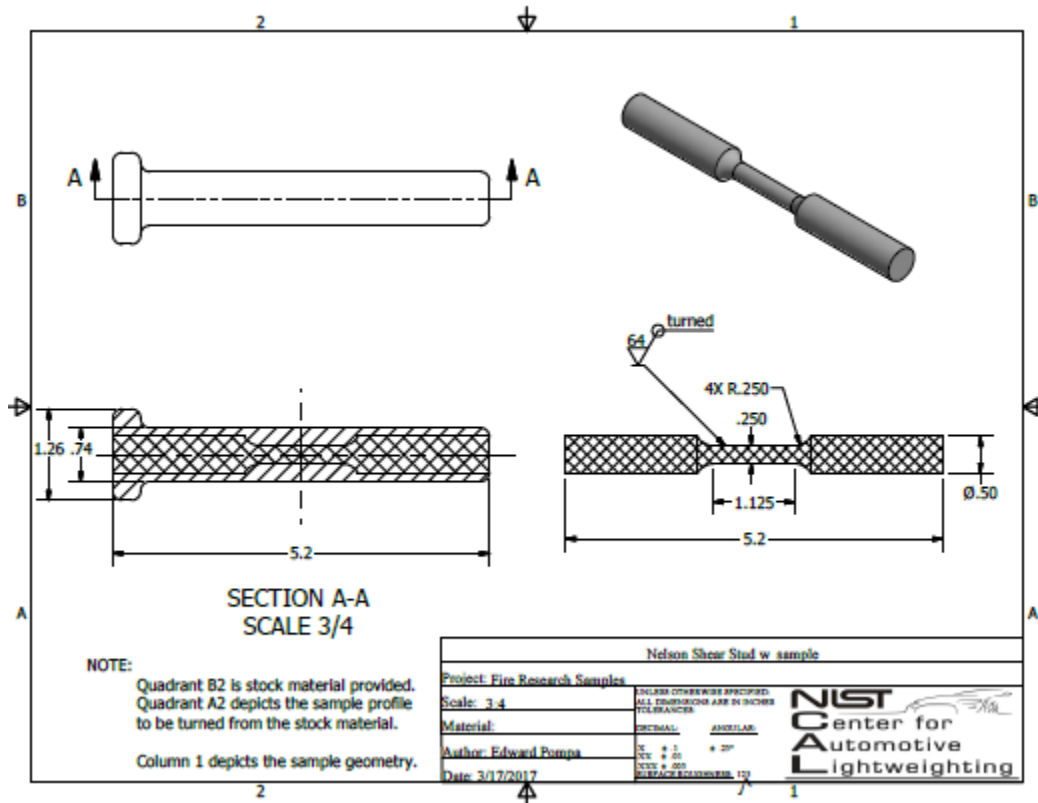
Tensile specimen machined from shear stud. Units = cm.
